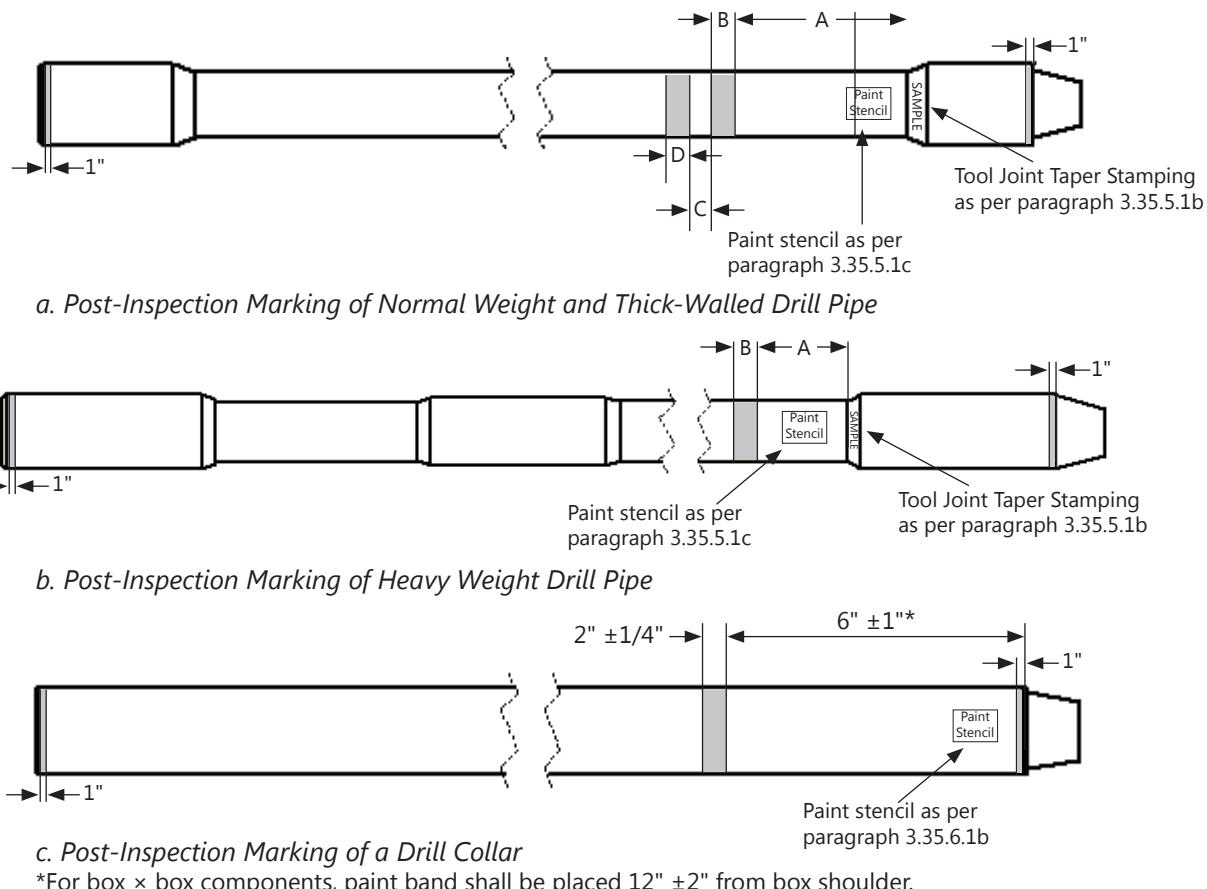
Post-Inspection marking Scheme-B of Drill Stem Components
